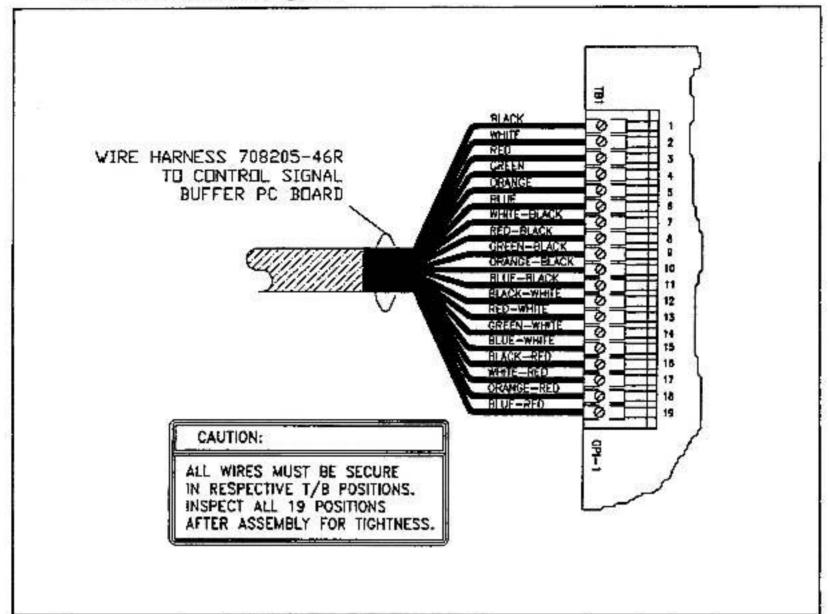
Control Signal Buffer to GP2000 Regulator Wiring Locations.
